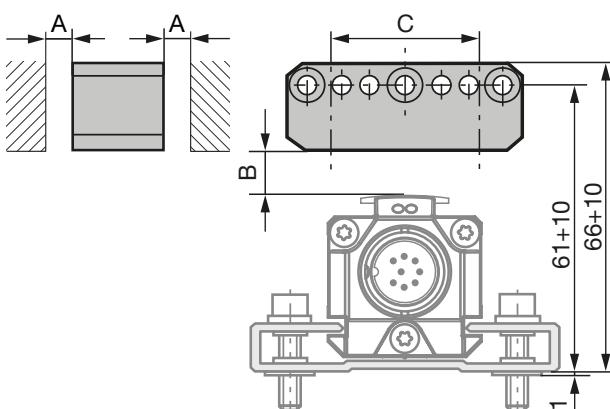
Dimensions and distances with BTL5-P-5500-2 magnet
